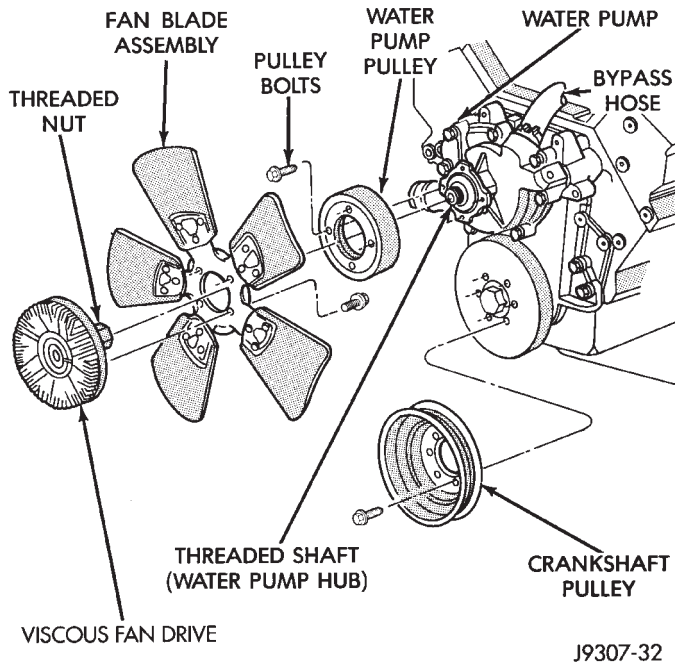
Fan Blade/Viscous Fan Drive—3.9L/5.2L/5.9L Engine
